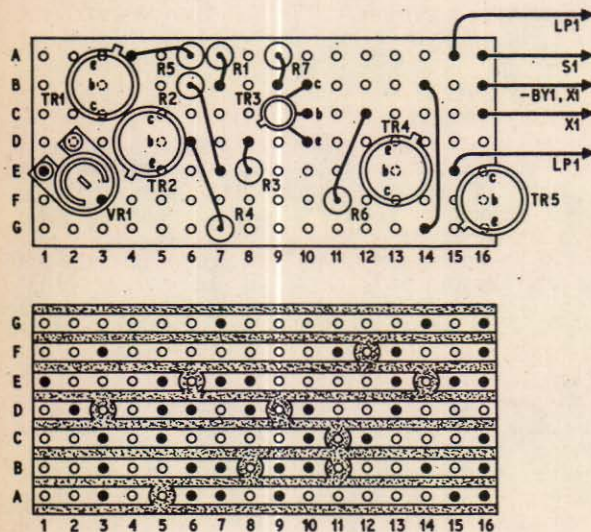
Veroboard assembly showing top view arrangement of components and breaks in conductor strips
